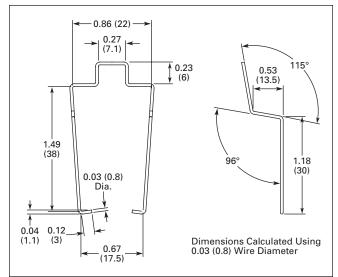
PQC-1342 — Approximate Dimensions in Inches (mm)
